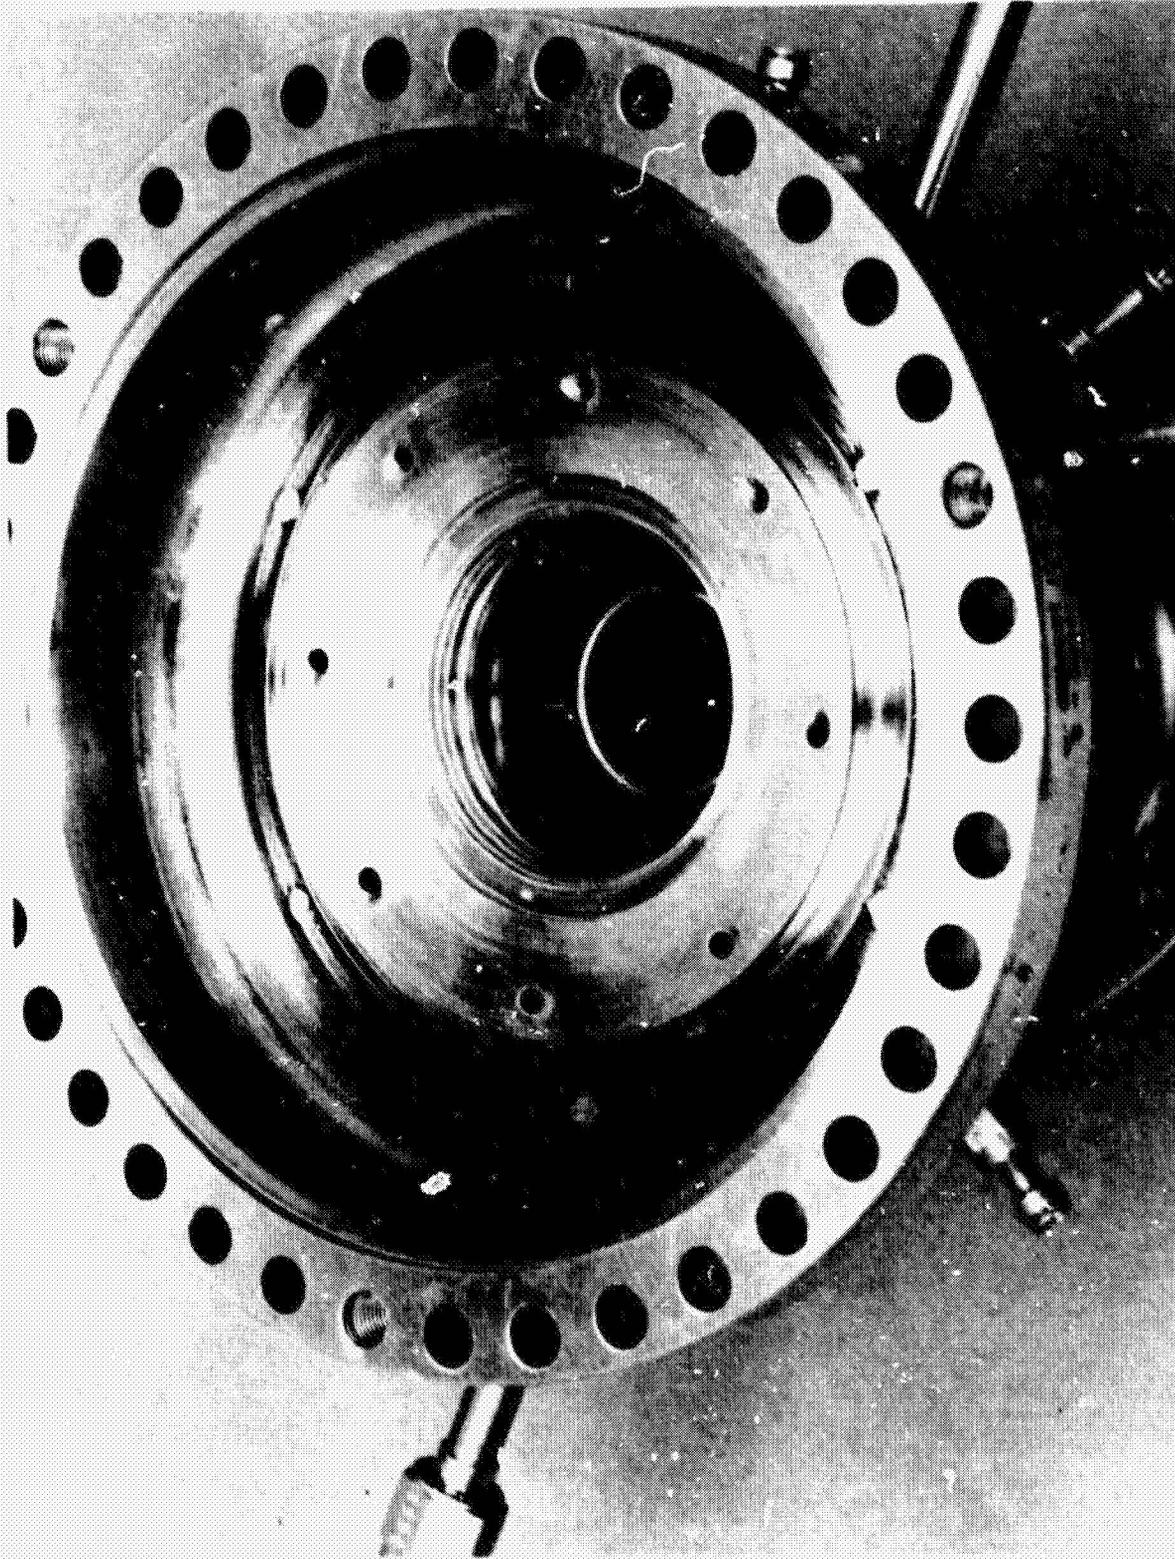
Pump Inlet Housing with Eight Bearing Supply Tapoff Holes
